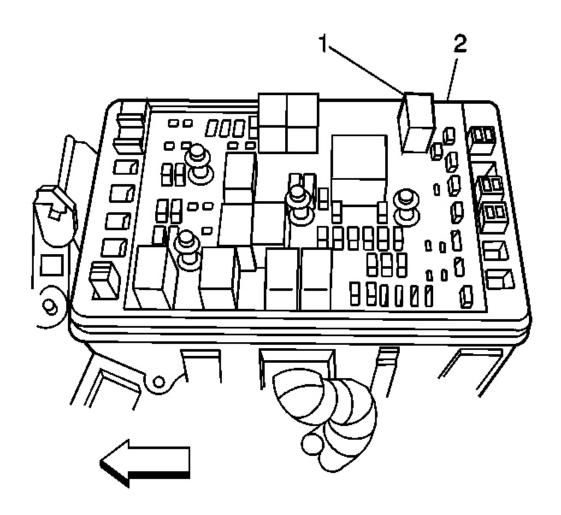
Locating Cooling Fan Relay Courtesy of GENERAL MOTORS CORP.
